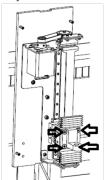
Pull the Z axis front cover to the front and remove the 4 screws that are holding the probe holder
